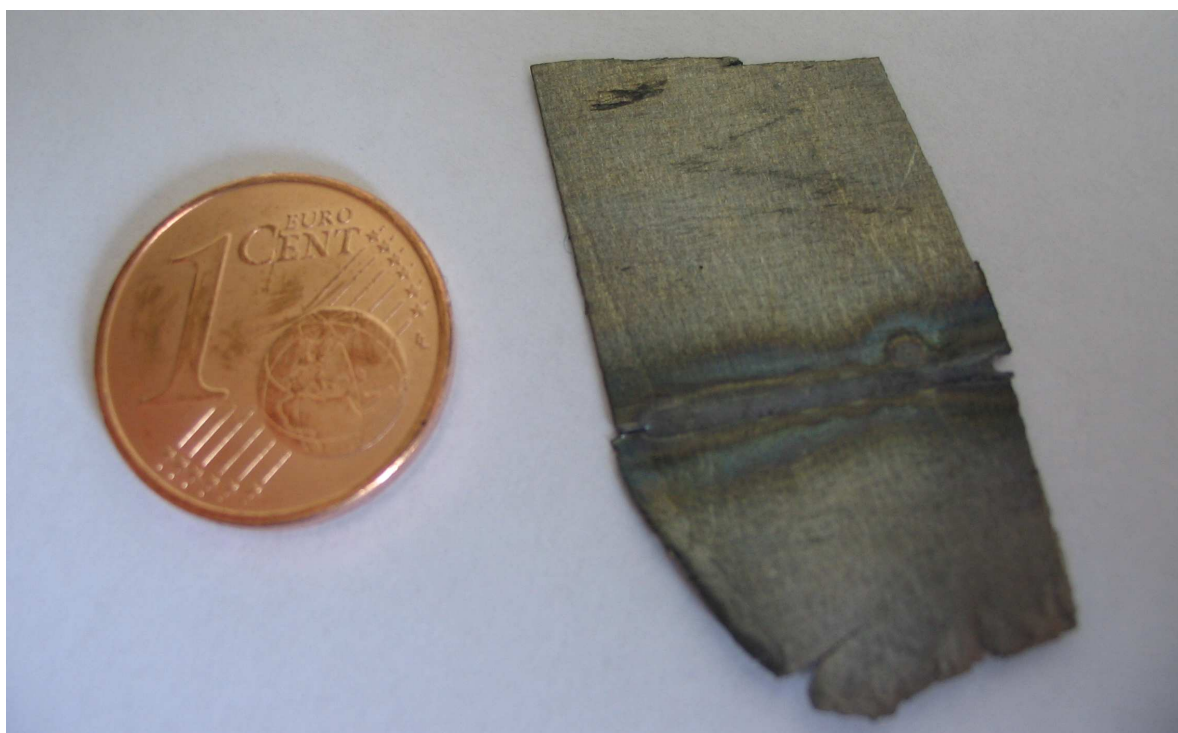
Photograph of two Gd samples welded together with electron beam welding.
